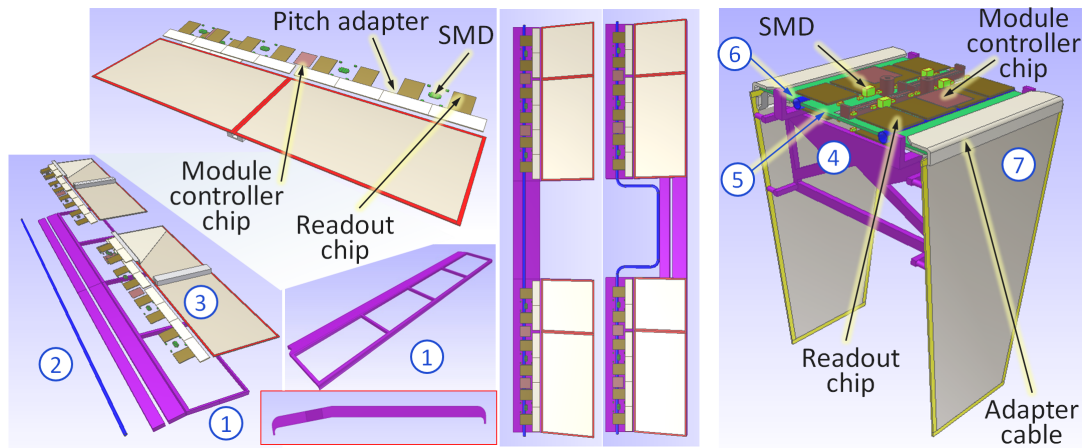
Super-module concept for the strip barrel layer (*left*) and the forward disks (*right*). A detector module consists of the sensor, readout chips, a module controller chip and additional SMD components. A stave support (1) is introduced for the barrel super-modules. Further components are the embedded cooling pipe (2) and the detector modules (3). Modified super-modules (*middle*) are required to achieve the target pipe passageway. A sophisticated carbon support structure is required for the disk super-module (4). All electronics placed in between the sensors is put on a PCB (5), which also stiffens the whole structure. Cooling pipes (6) are placed below the readout chips. An adapter cable (7) allows the connection to the sensor.
